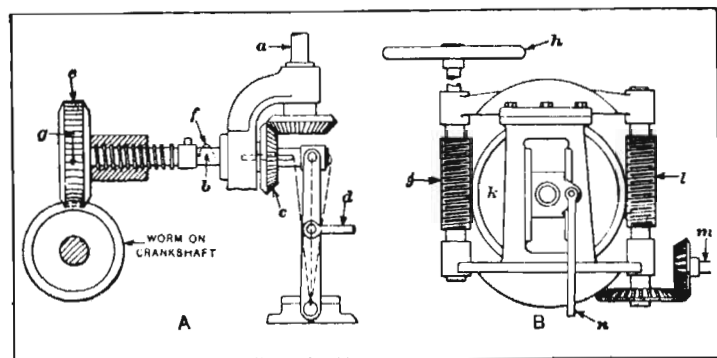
(A) Controlling Device for Steering Gear; (B) Mechanism Used as Substitute for a Floating Lever
